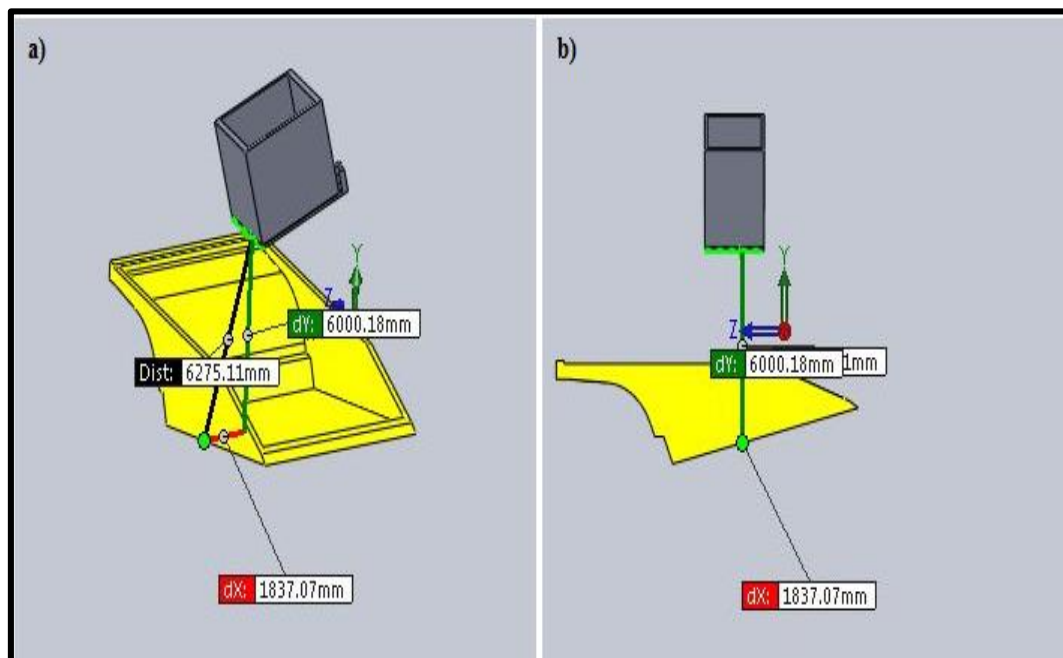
Truck Body and Shovel Dipper CAD Assembly for $H_t = 6.00$ m (6000 mm):
